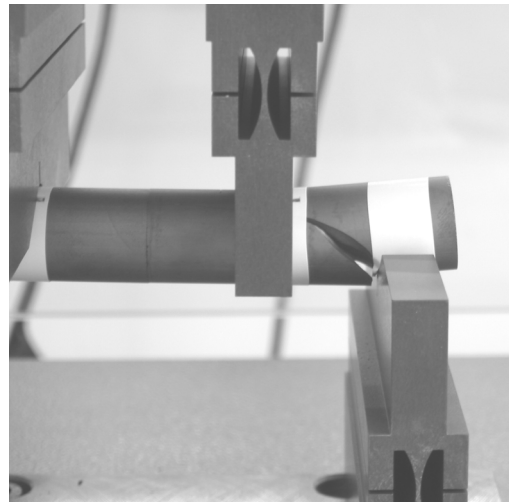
Fractured specimen 6 zoomed in at the lower right V-block
